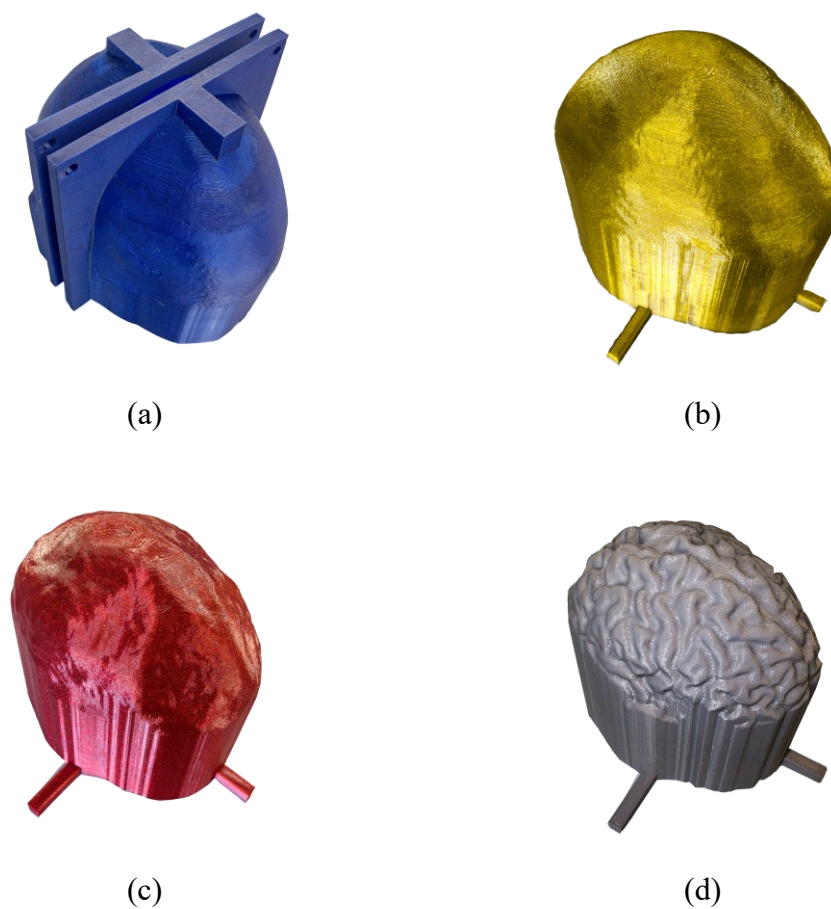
3D printed molds for multilayer human head phantom fabrication. (a) scalp mold, (b) skull mold, (c) cerebrospinal fluid mold, and (d) brain mold.
